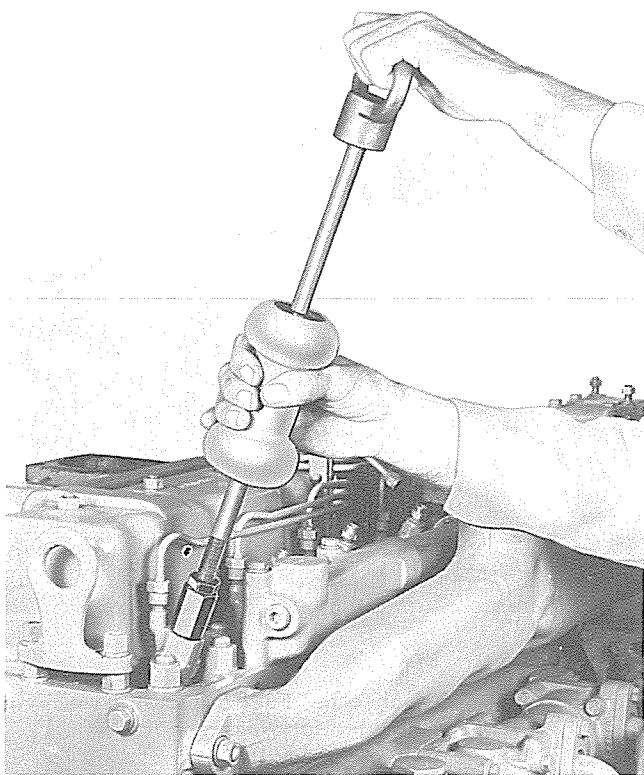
Removing Fuel Injection Nozzle-Holder
